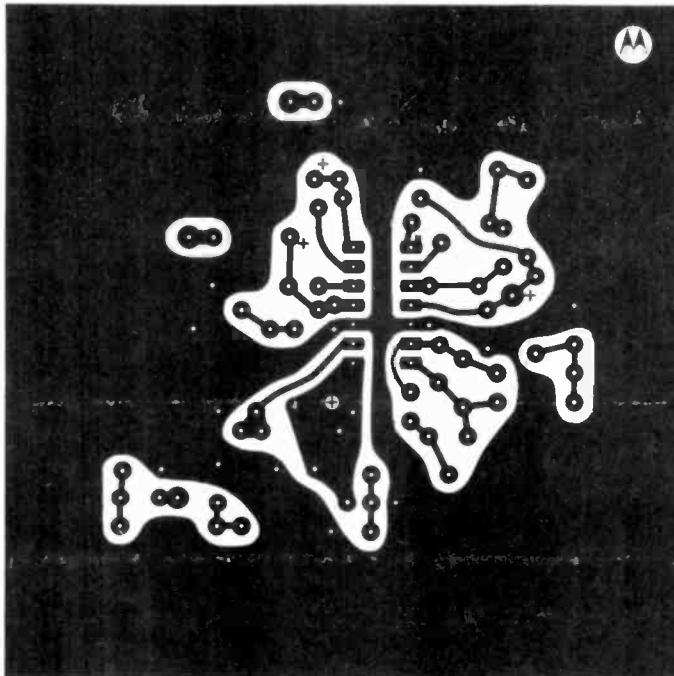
Exact-size guide for a printed-circuit board is shown below. The component layout diagram is at right. Use any regulated 12-volt power supply.
